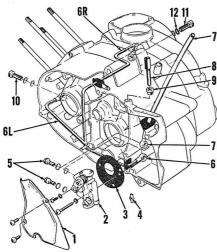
View of the engine oil injection system. Top end of the inlet oil line (7) connects to the oil tank filter. Gaskets are used on both sides of all banjo fittings; however, "O" ring (12) is also used at check valve (11).
